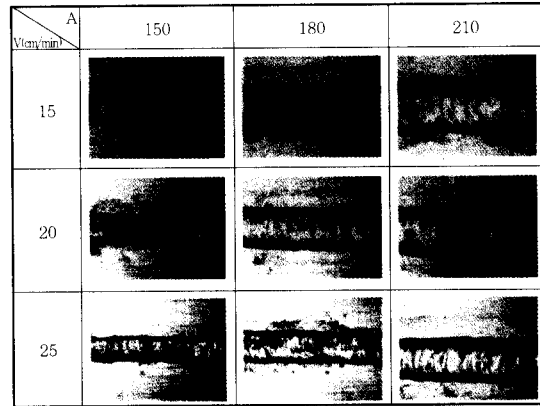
General appearance of WC-12%Co powders free overlay weld alloy surfaces.
